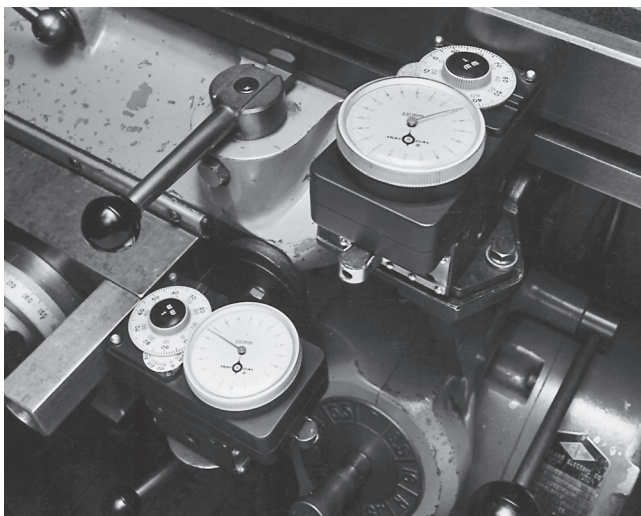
Metric mechanical dial travel indicators reading milling machine saddle and table movement (Southwestern Industries, Inc.).
